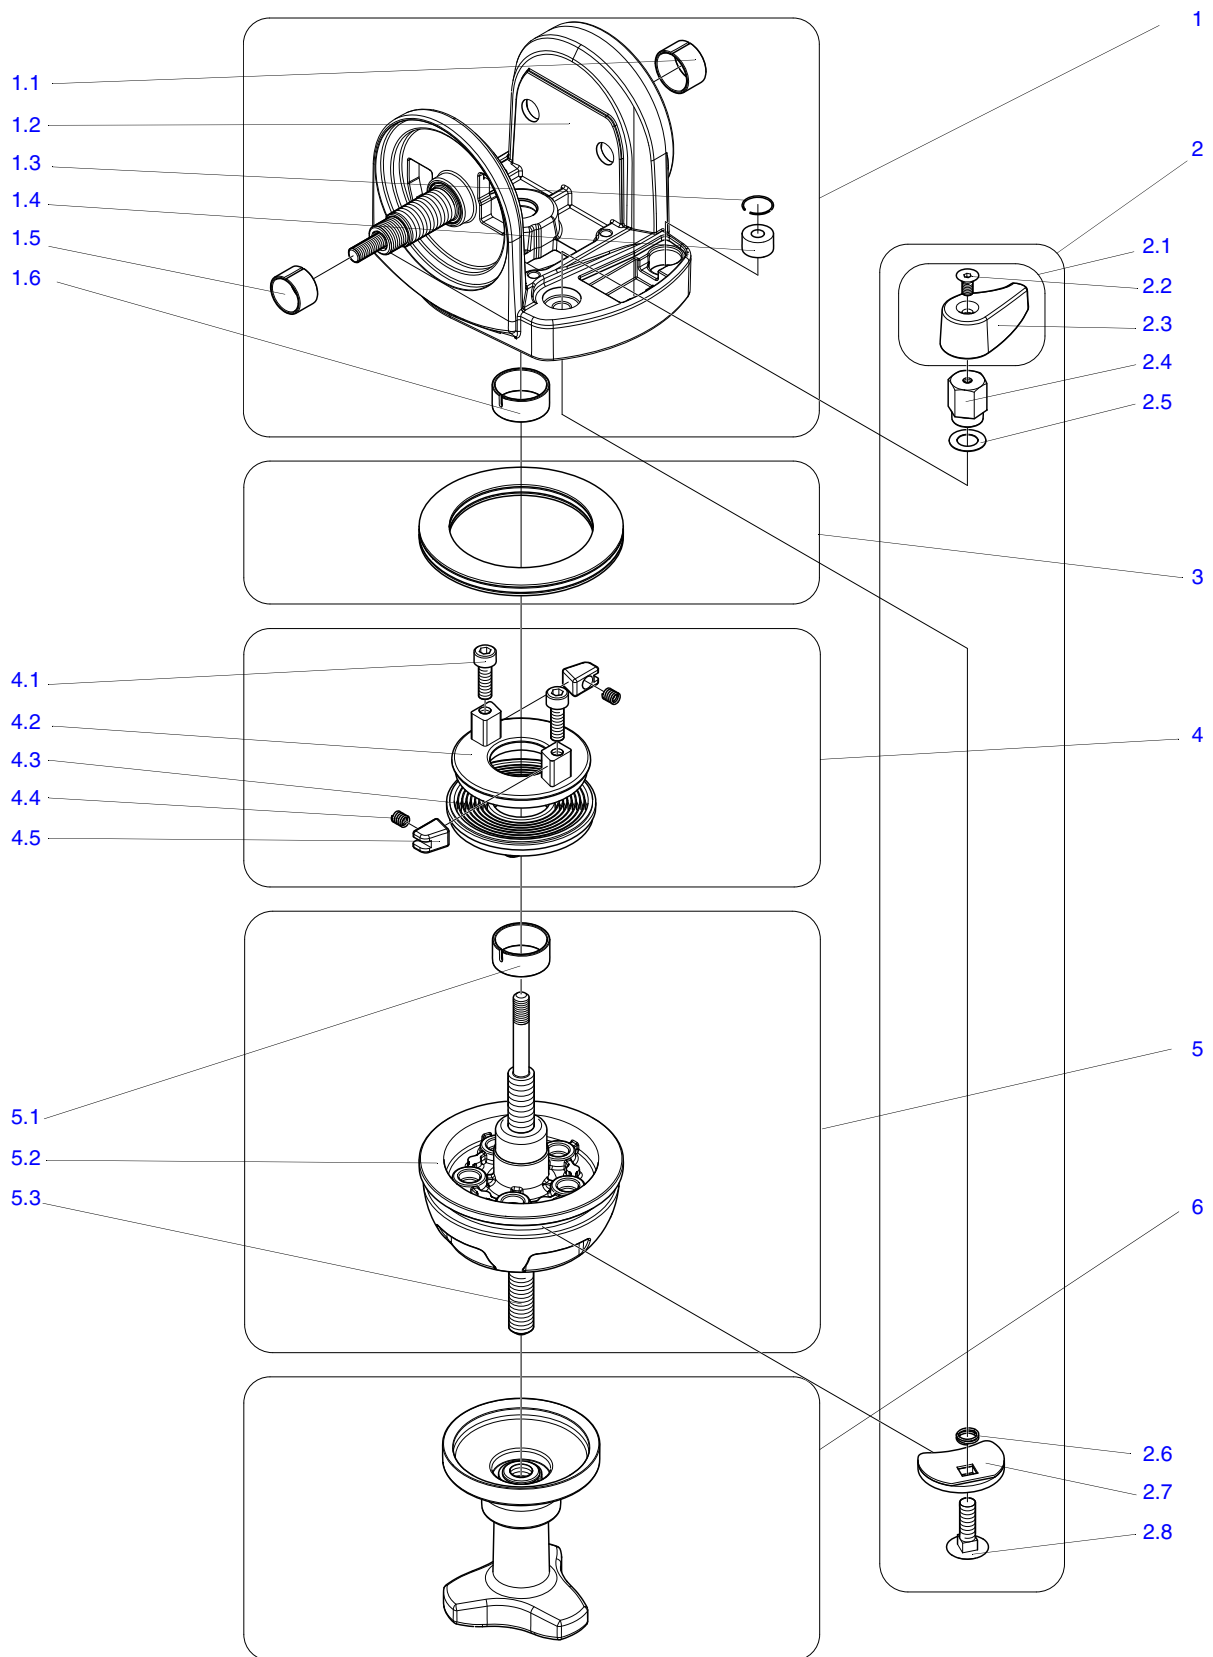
Pro-6^{HDV} Pan and Tilt Head - Pan Drag and Ball Base
